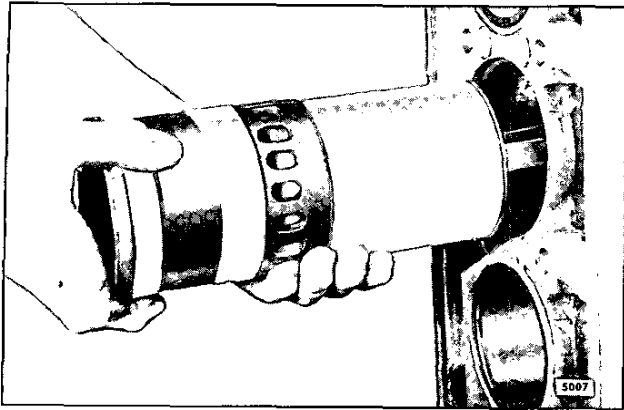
Installing Piston, Rod and Liner Assembly in Cylinder Block
